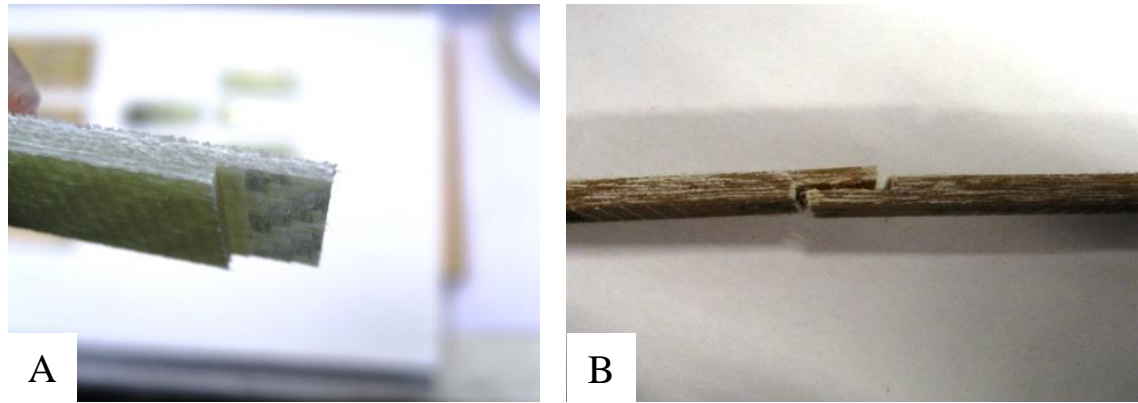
(A) GFRP with Palapreg-Eco resin ILSS sample fracture surface (B) Hemp yarn reinforced Palapreg-Eco ILSS sample after the test
